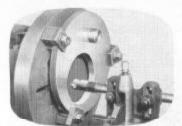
, Boring an Eccentric on Lathe Face Plate.
